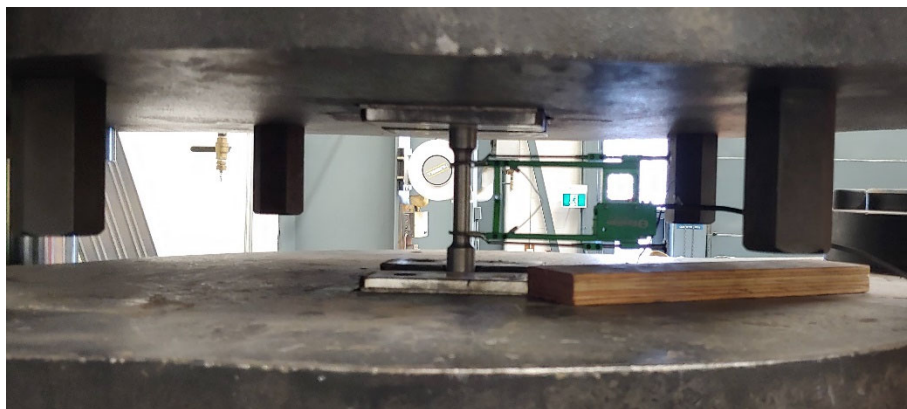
All weld metal TC instrumented and in the 2 MN MTS universal testing machine
